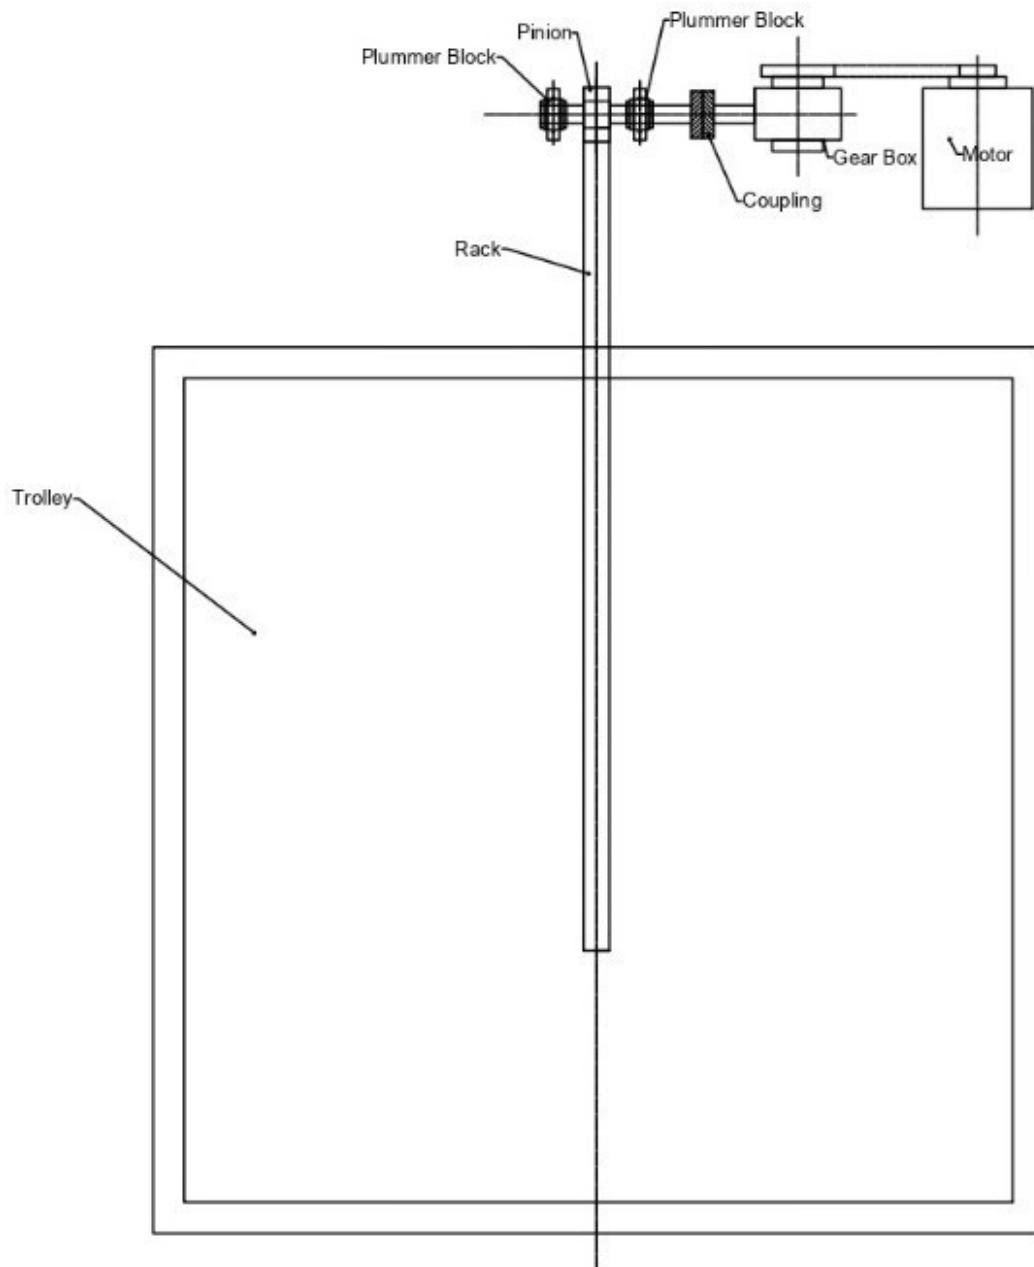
Assembly of Rack & Pinion Mechanism in CAD Software (AUTOCAD)
